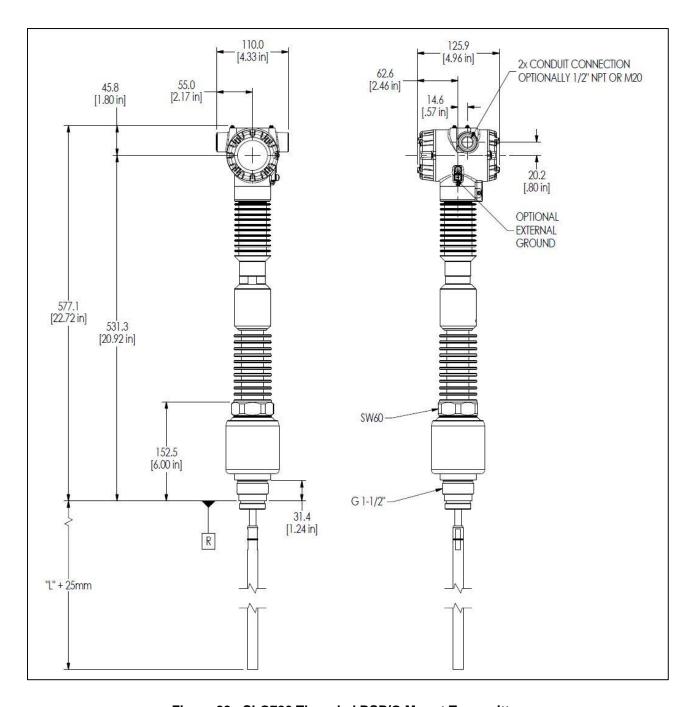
SLG726 Threaded BSP/G Mount Transmitter
